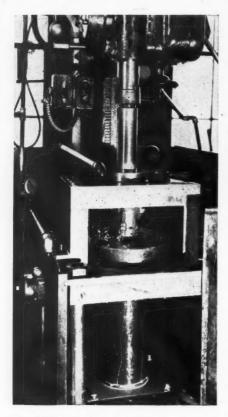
Set-up for counterboring a "super shrink grip" tool joint on a drill pipe, using a Cincinnati-Bickford vertical drill and a special fixture. Limits on concentricity and diameter are 0.003 inch.
